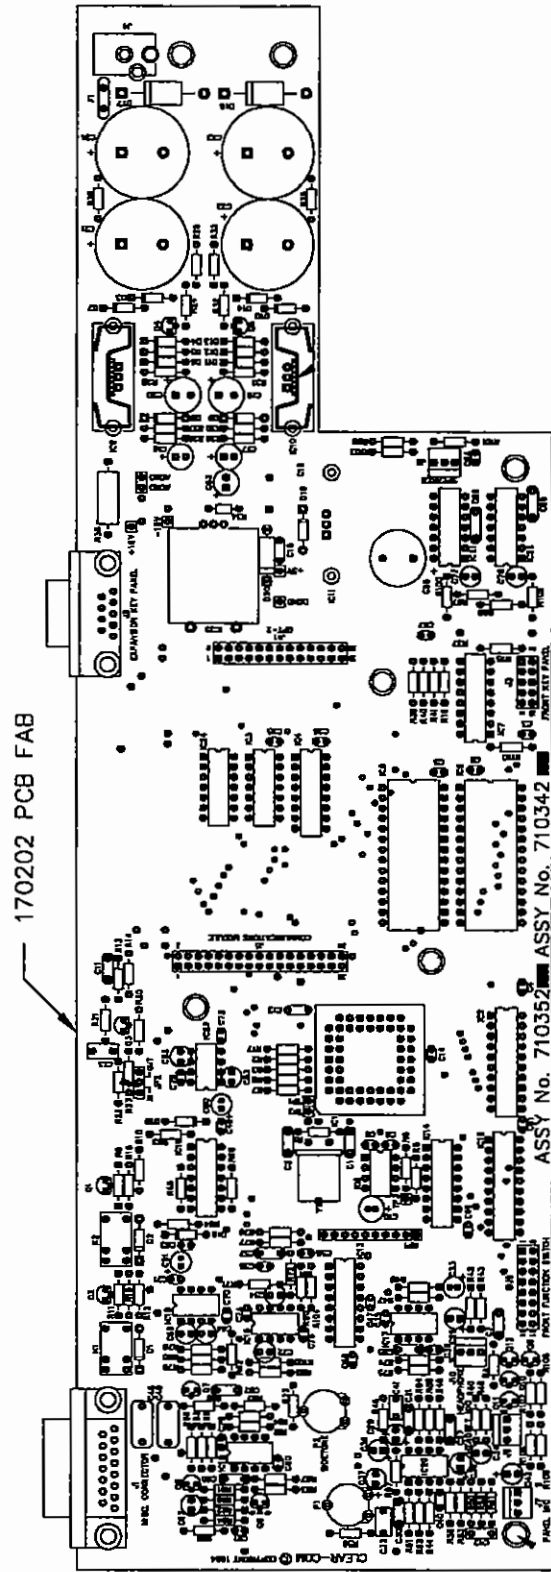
Assembly Drawing - ICS-52/ICS-92 Main PCB Rev.A
